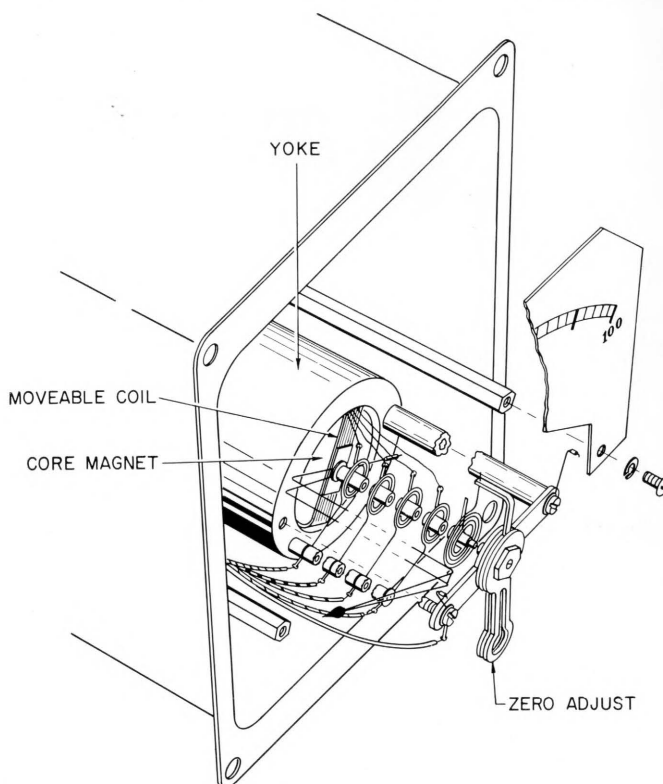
Exploded view of mechanism assembly. Weston Model 610 D-C Summation Meter.
